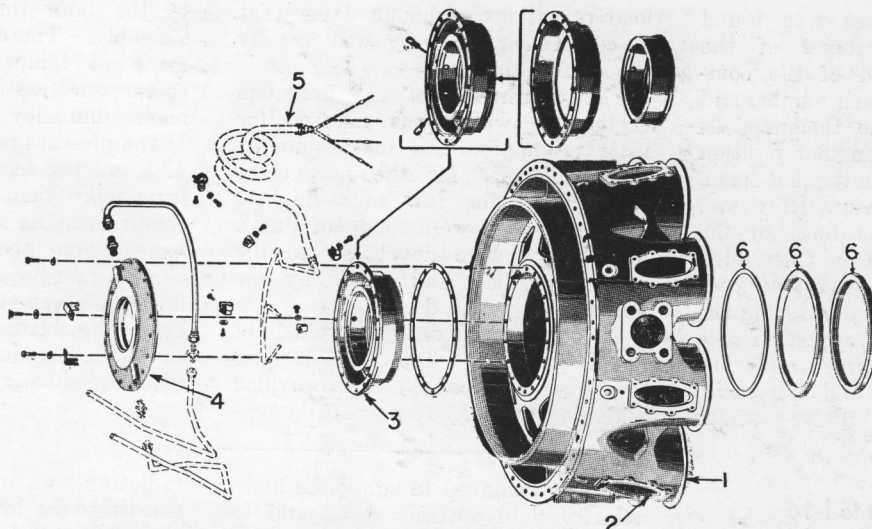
The TG-180 mid-frame assembly detail shows: (1) combustion chamber opening; (2) fuel nozzle port; (3) No. 2 bearing housing; (4) bearing oil seal; (5) thermocouple; (6) parts for the assembly of No. 2 bearing housing.
